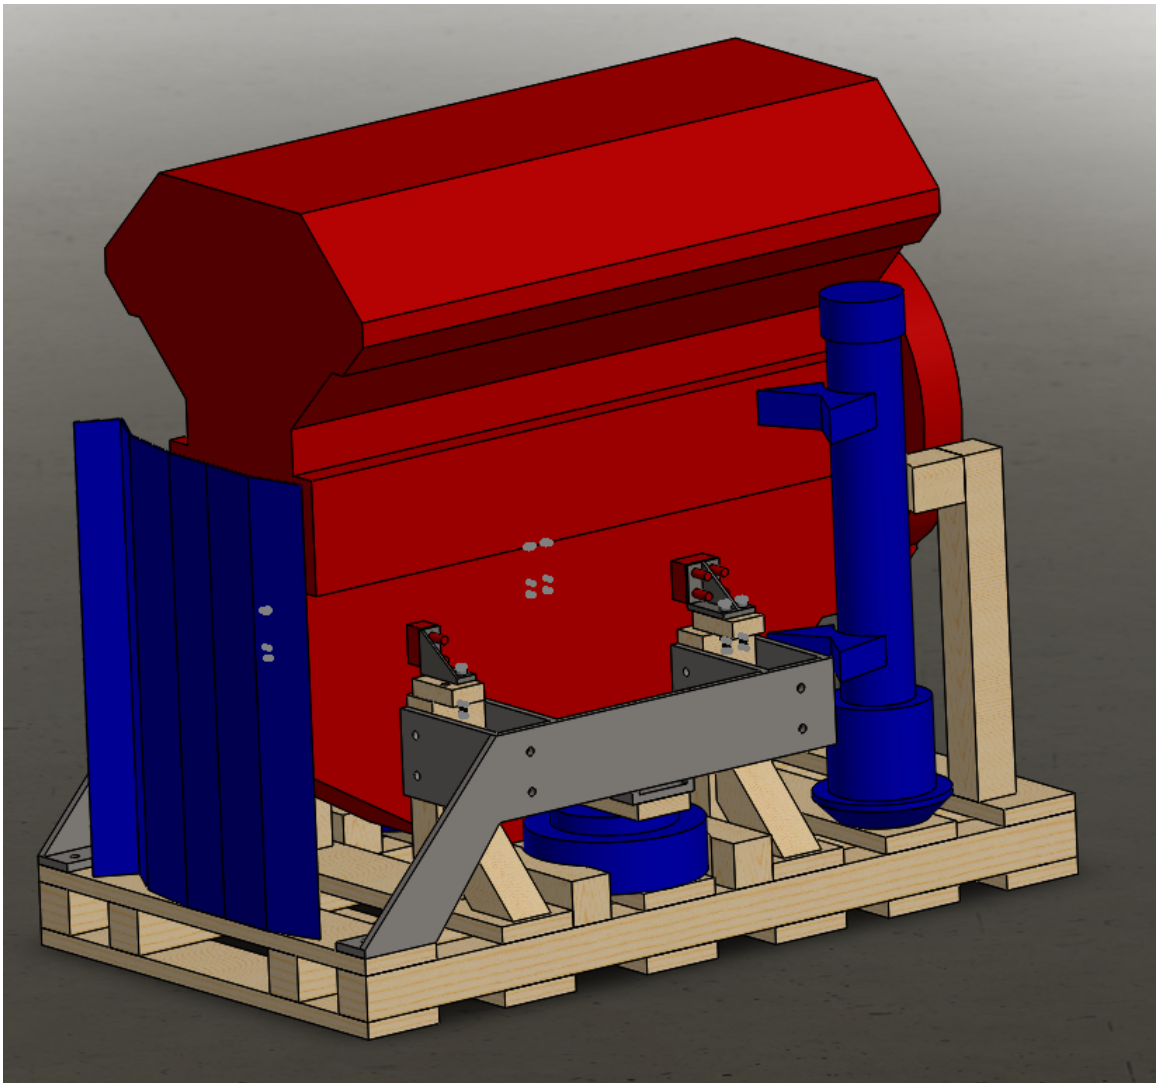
Engine P-Module with minor objects placed on the same pallet
